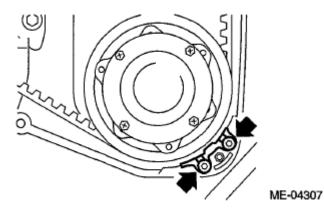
Locating Timing Belt Guide Bolts (3 Of 4) Courtesy of SUBARU OF AMERICA, INC.
